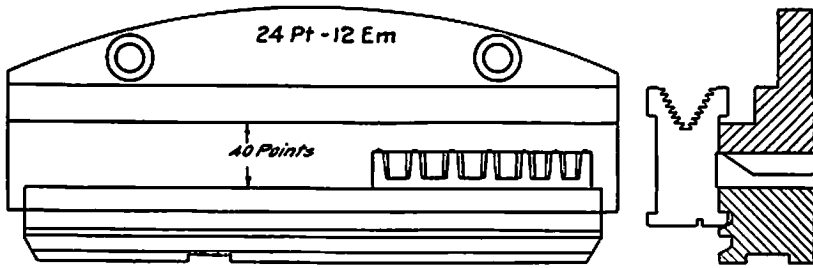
Headletter Recessed Mold. Molds of this type are made to suit the measures desired and require no liners. These molds are designed for casting recessed slugs in 16, 18, 24, 30 or 36 point sizes. Molds similar to that shown but with a high alignment mold body are made for casting 42 or 48 point slugs. Any length up to 30 ems can be provided. Only one point size and length can be cast with a mold cap.
